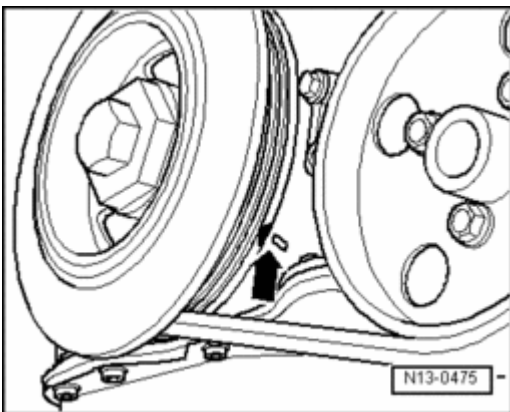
Identifying Crankshaft At Vibration Damper Securing Bolt In Engine At TDC Cyl. 1
